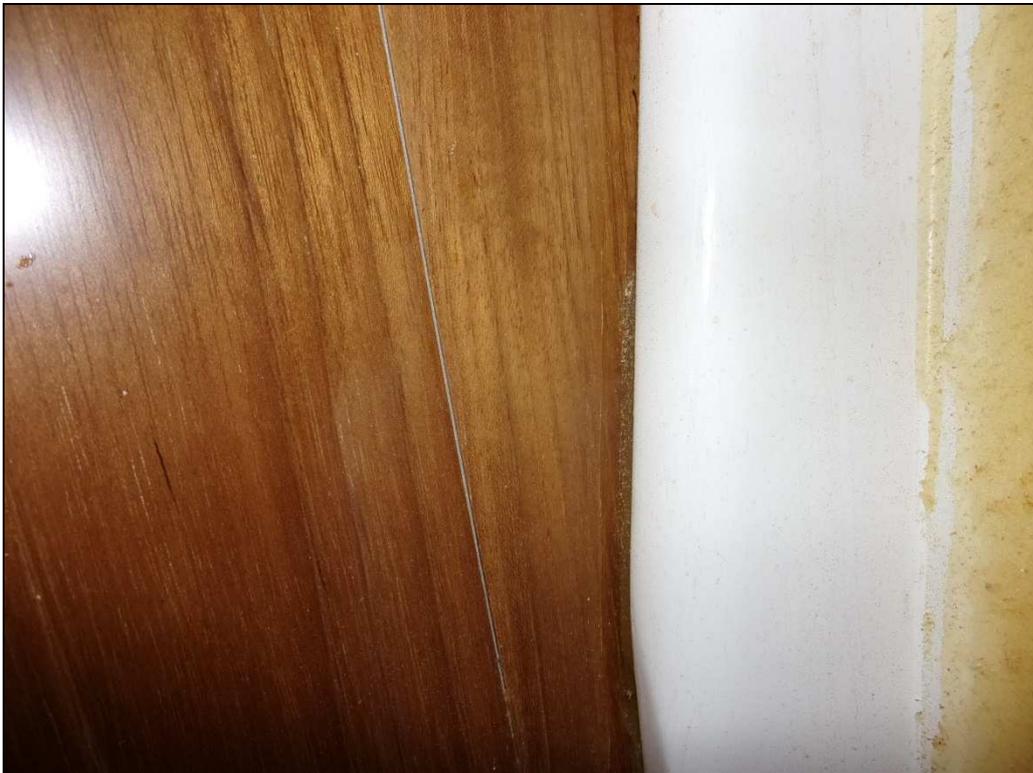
bulkheads bonded / sealed to hull side mouldings.
